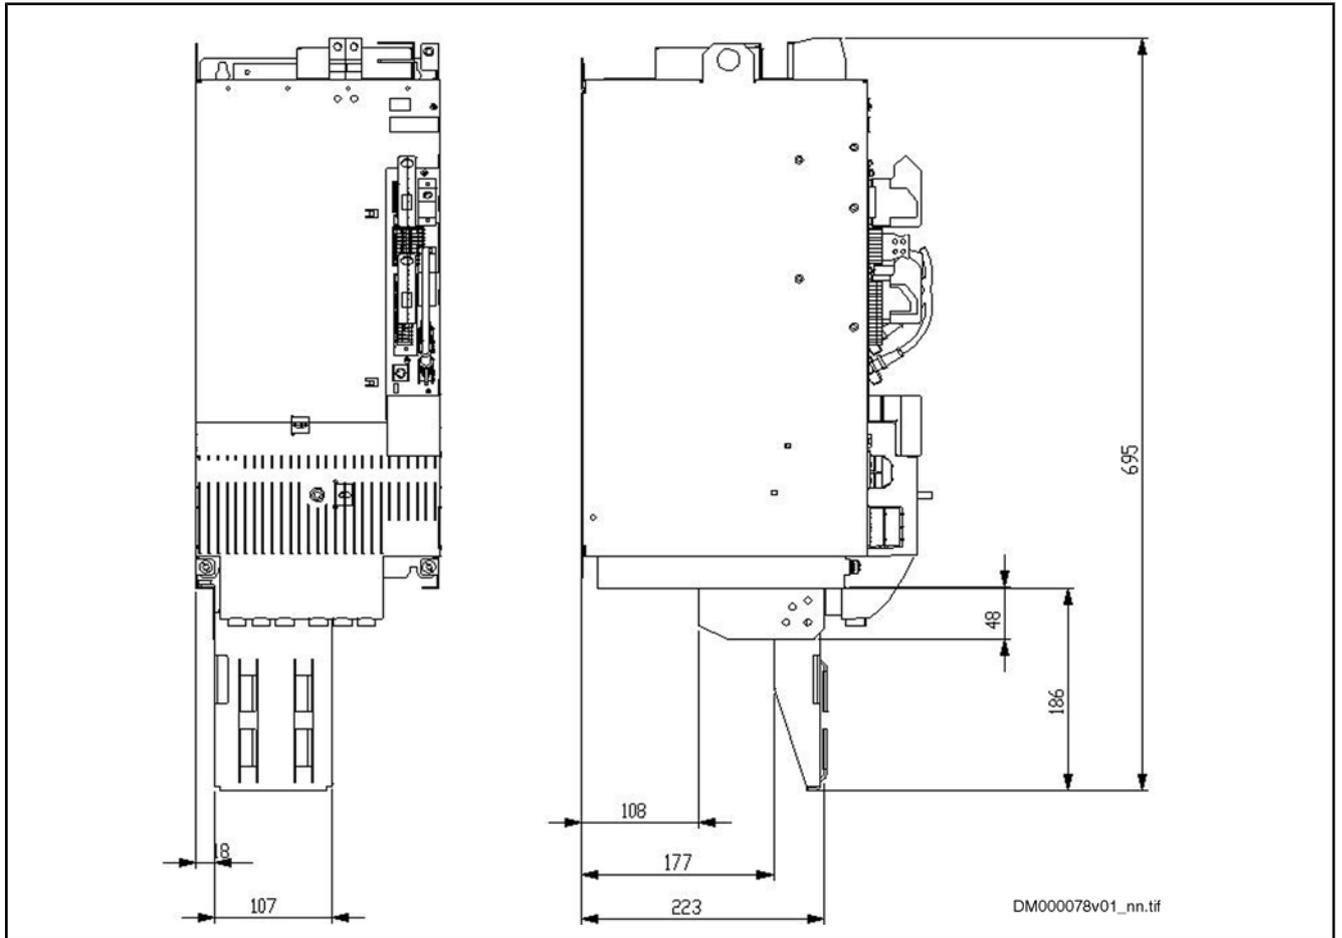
Dimensional drawing HCS03.1E-W0100 and HCS03.1E-W150 with HAS02
